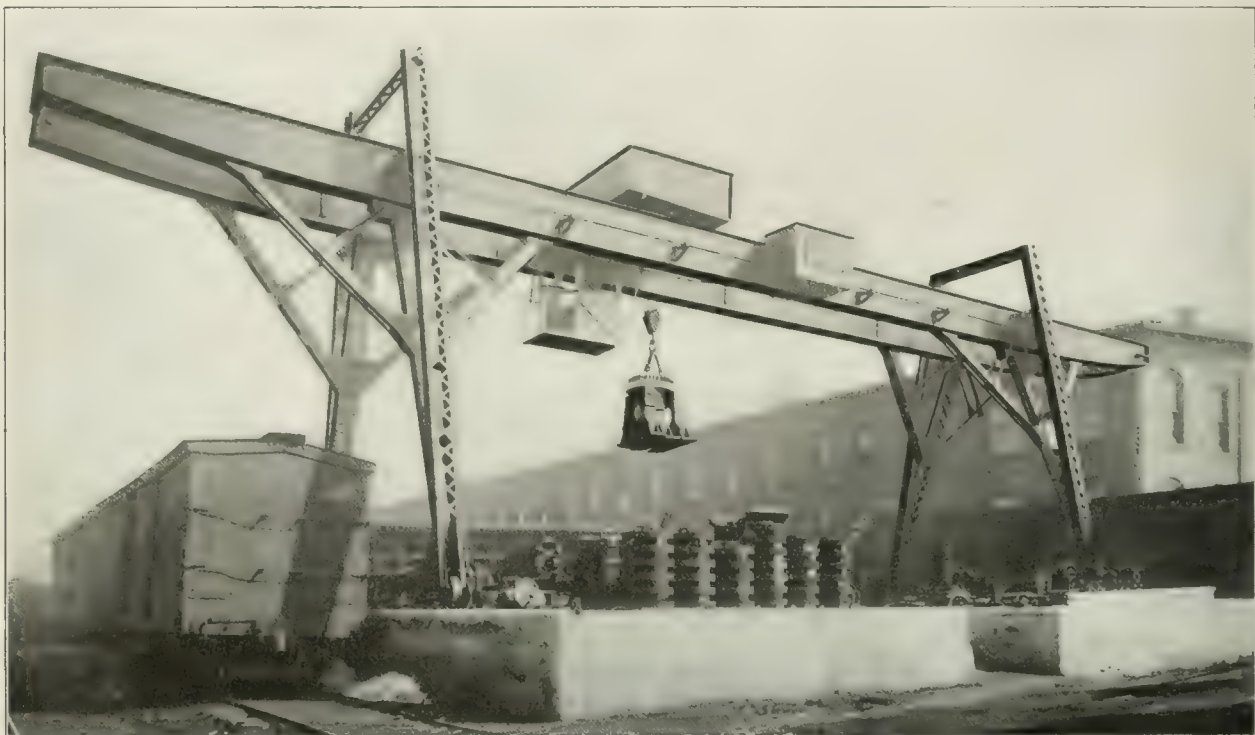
An Electric Gantry Crane for Handling Raw Material in a Foundry Yard Built by the Whiting Foundry Equipment Company, Harvey, Ill.
